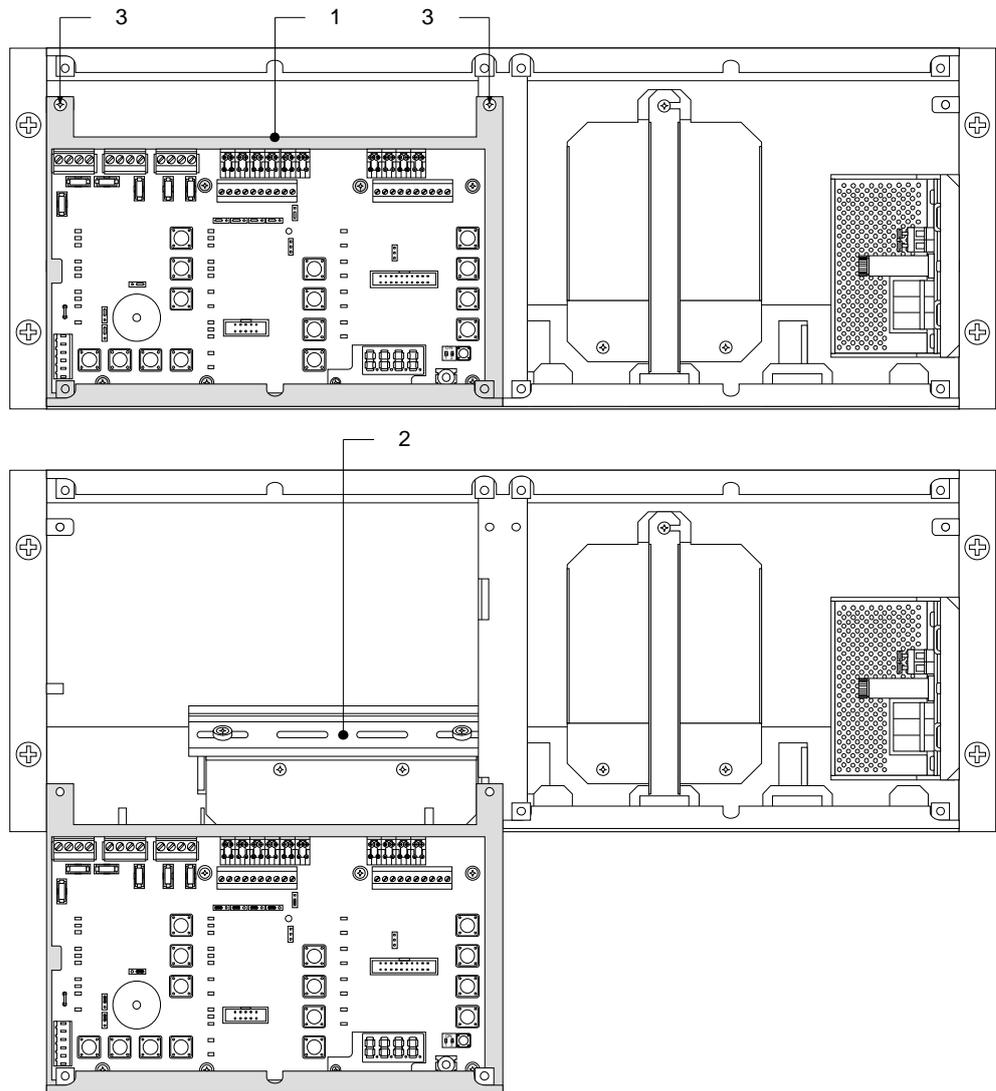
XC1003-A, removable stand in "Commissioning" position
